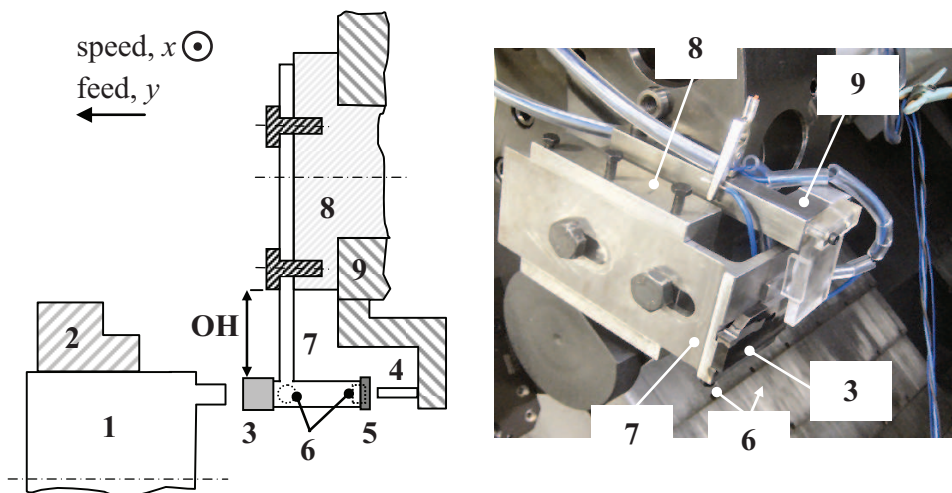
Experimental setup. 1 - workpiece with annular ring; 2 - lathe chuck; 3 - cutting insert in blade holder; 4 - displacement probe; 5 - aluminium target; 6 x,y accelerometers; 7 - flexure arm; 8 - base plate and VDI interface; 9 - turret and probe bracket.
